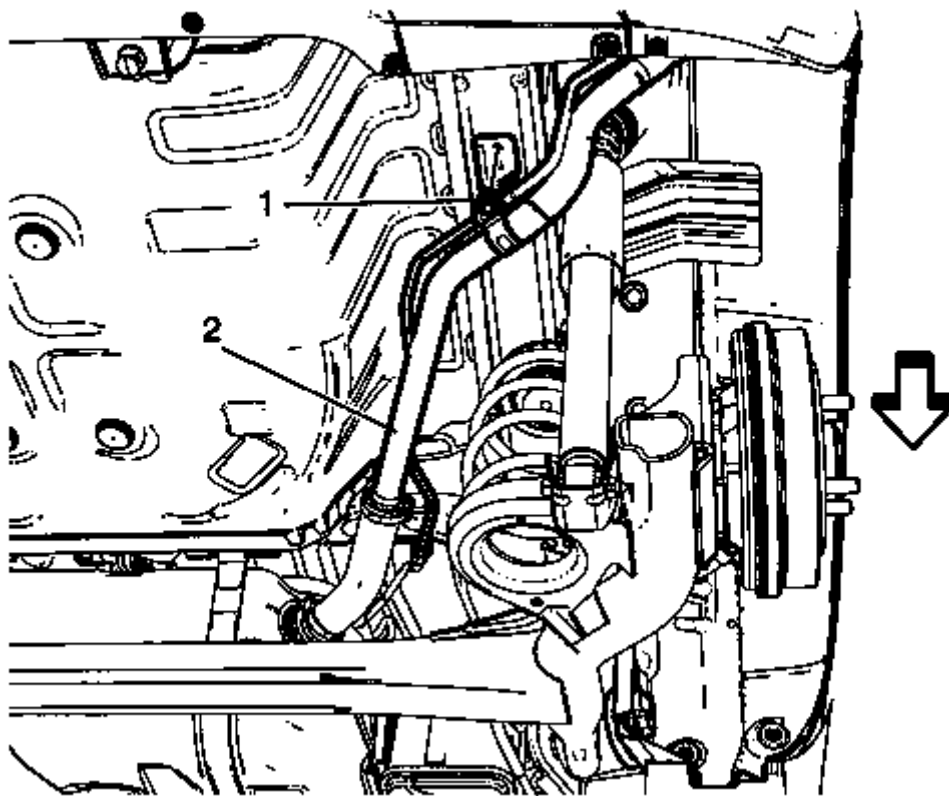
Fuel Tank Filler Pipe Lower Bolt
